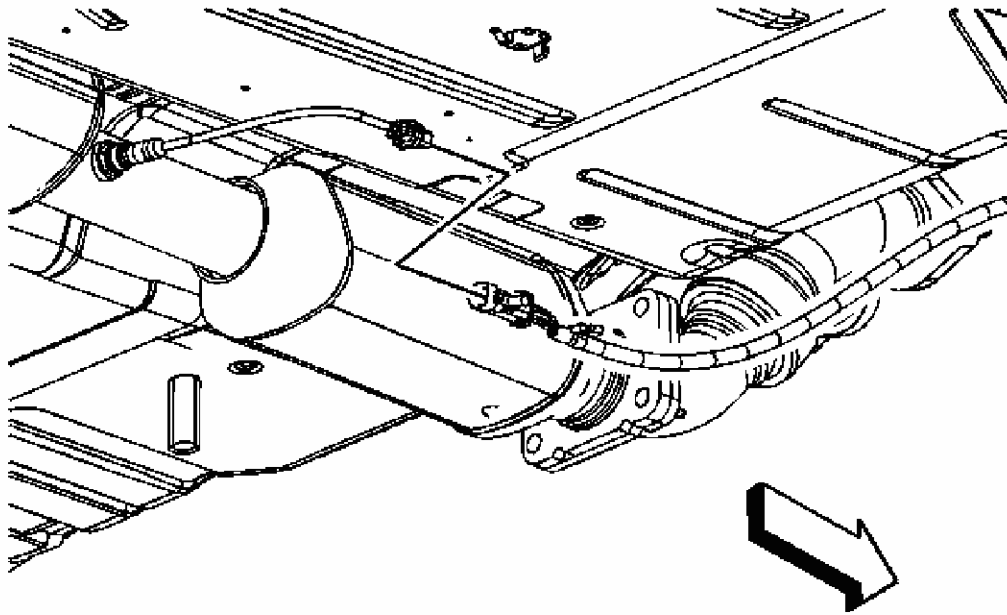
Identifying Oxygen Sensor Wiring Harness Heat Shield
